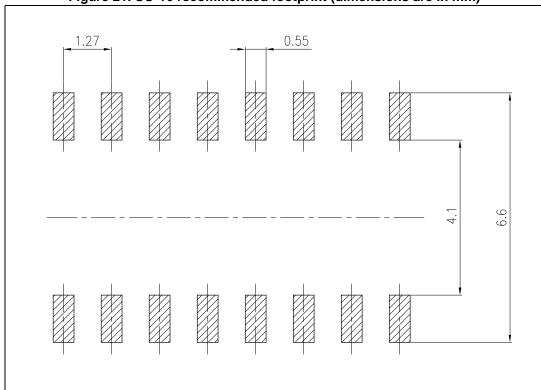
SO-16 recommended footprint (dimensions are in mm)
